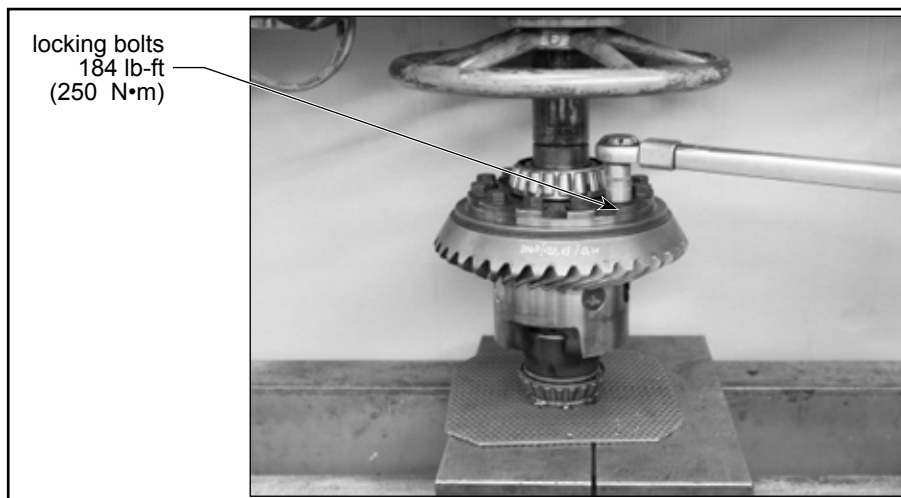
Mounting of Crown Wheel on Differential Carrier
